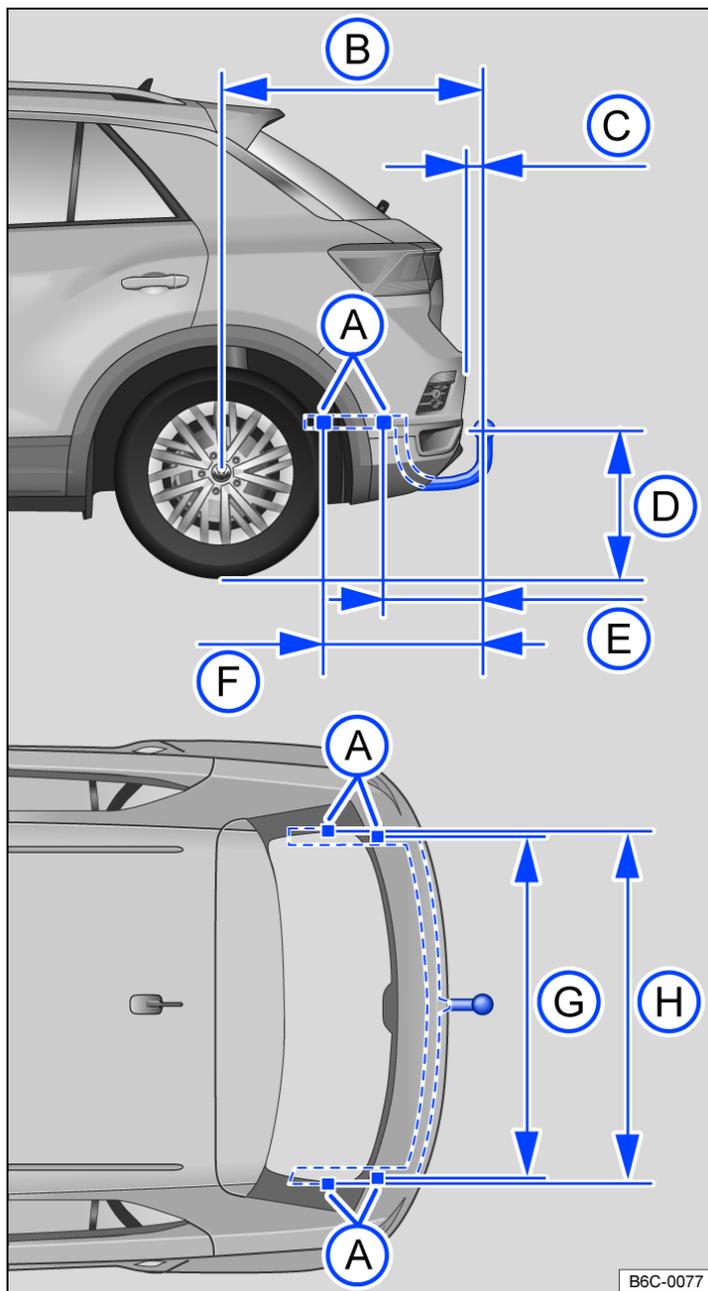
Dimensions and mounting points for retrofitting a towing bracket.
